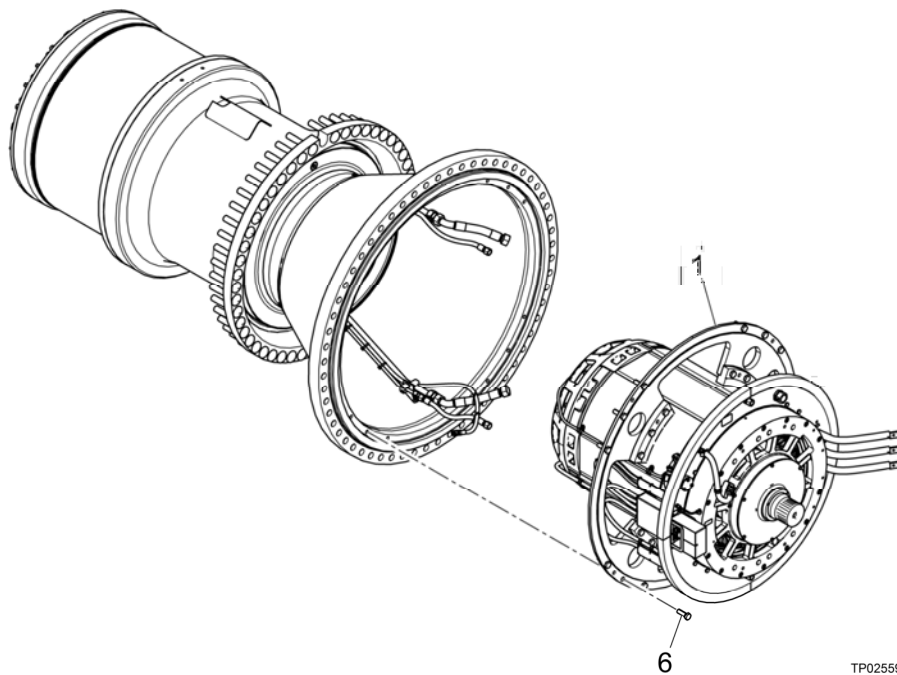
Rear Wheel Drive Assembly Removal/Installation
